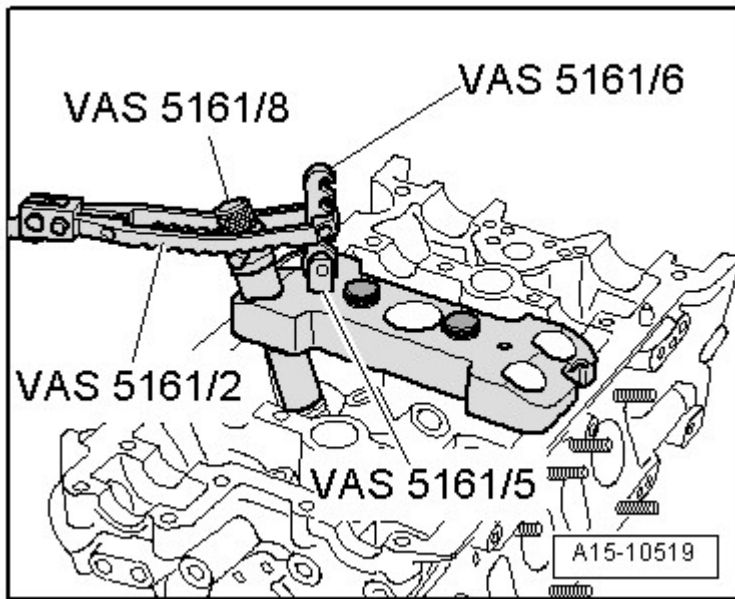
Identifying Engaging Device VAS 5161/6, Installation Fork VAS 5161/5 And Guide Plate, Removal/Installation
